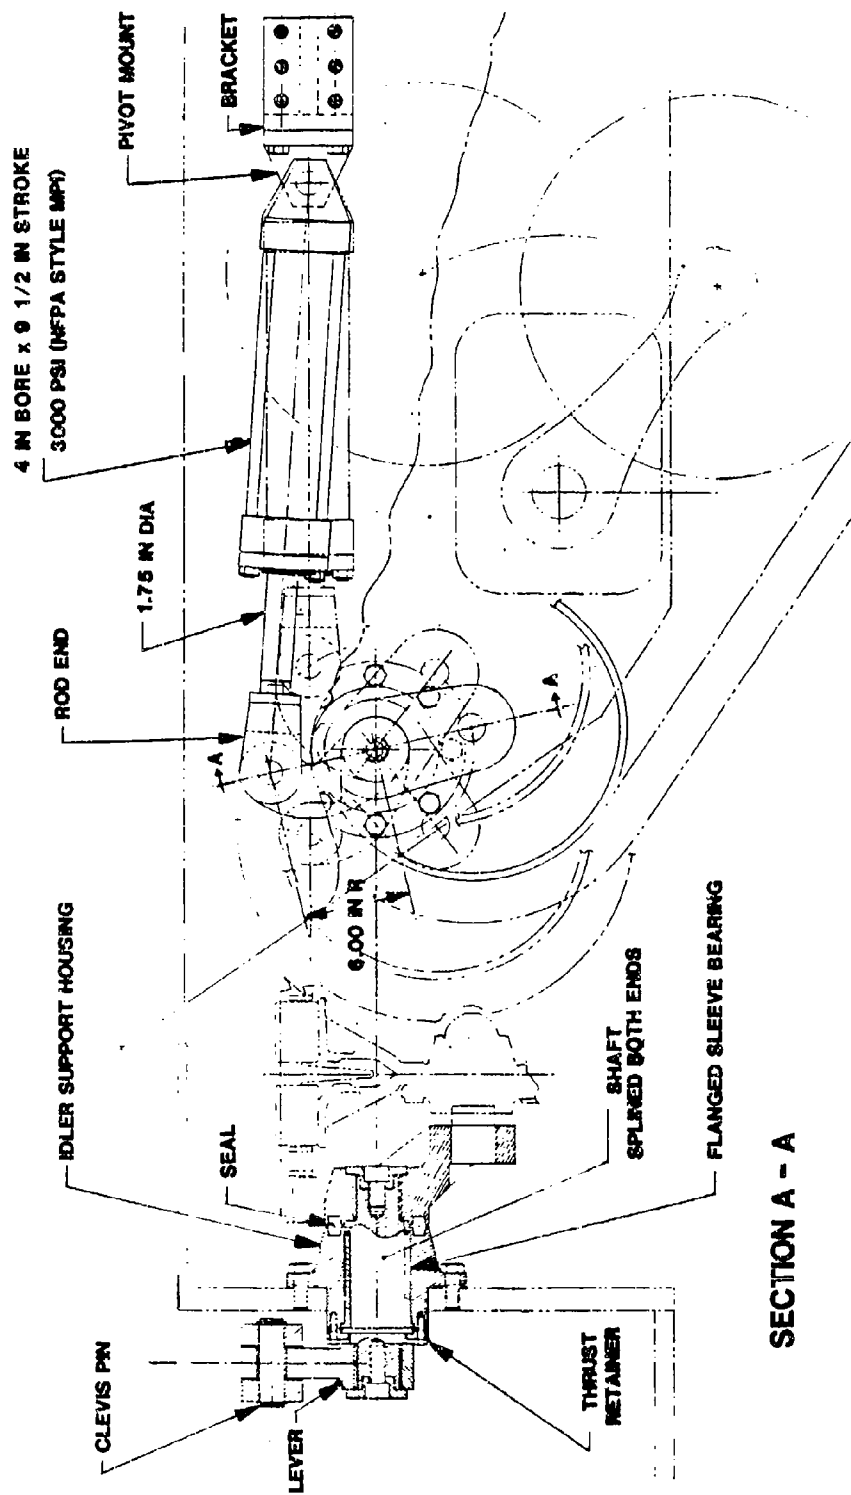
Hu11 Mounted Hydraulic Cylinder: LEVER
